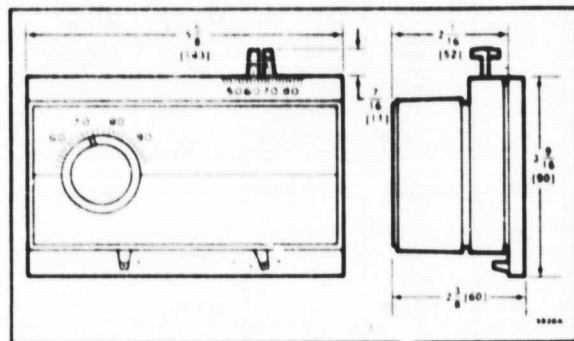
DIMENSIONS OF T872 THERMOSTAT MOUNTED ON Q672 SUBBASE.
